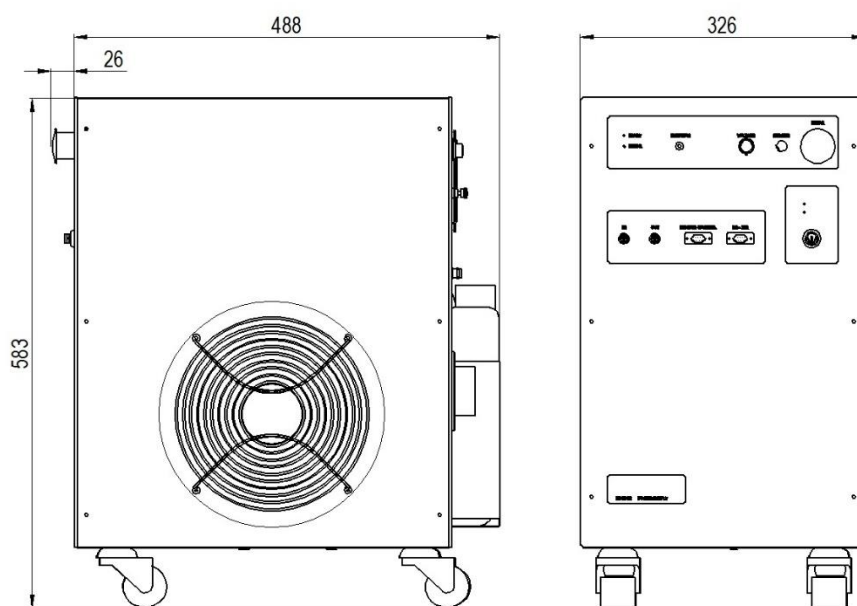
Dimensions of the NT342 laser power supply/cooling rack.
